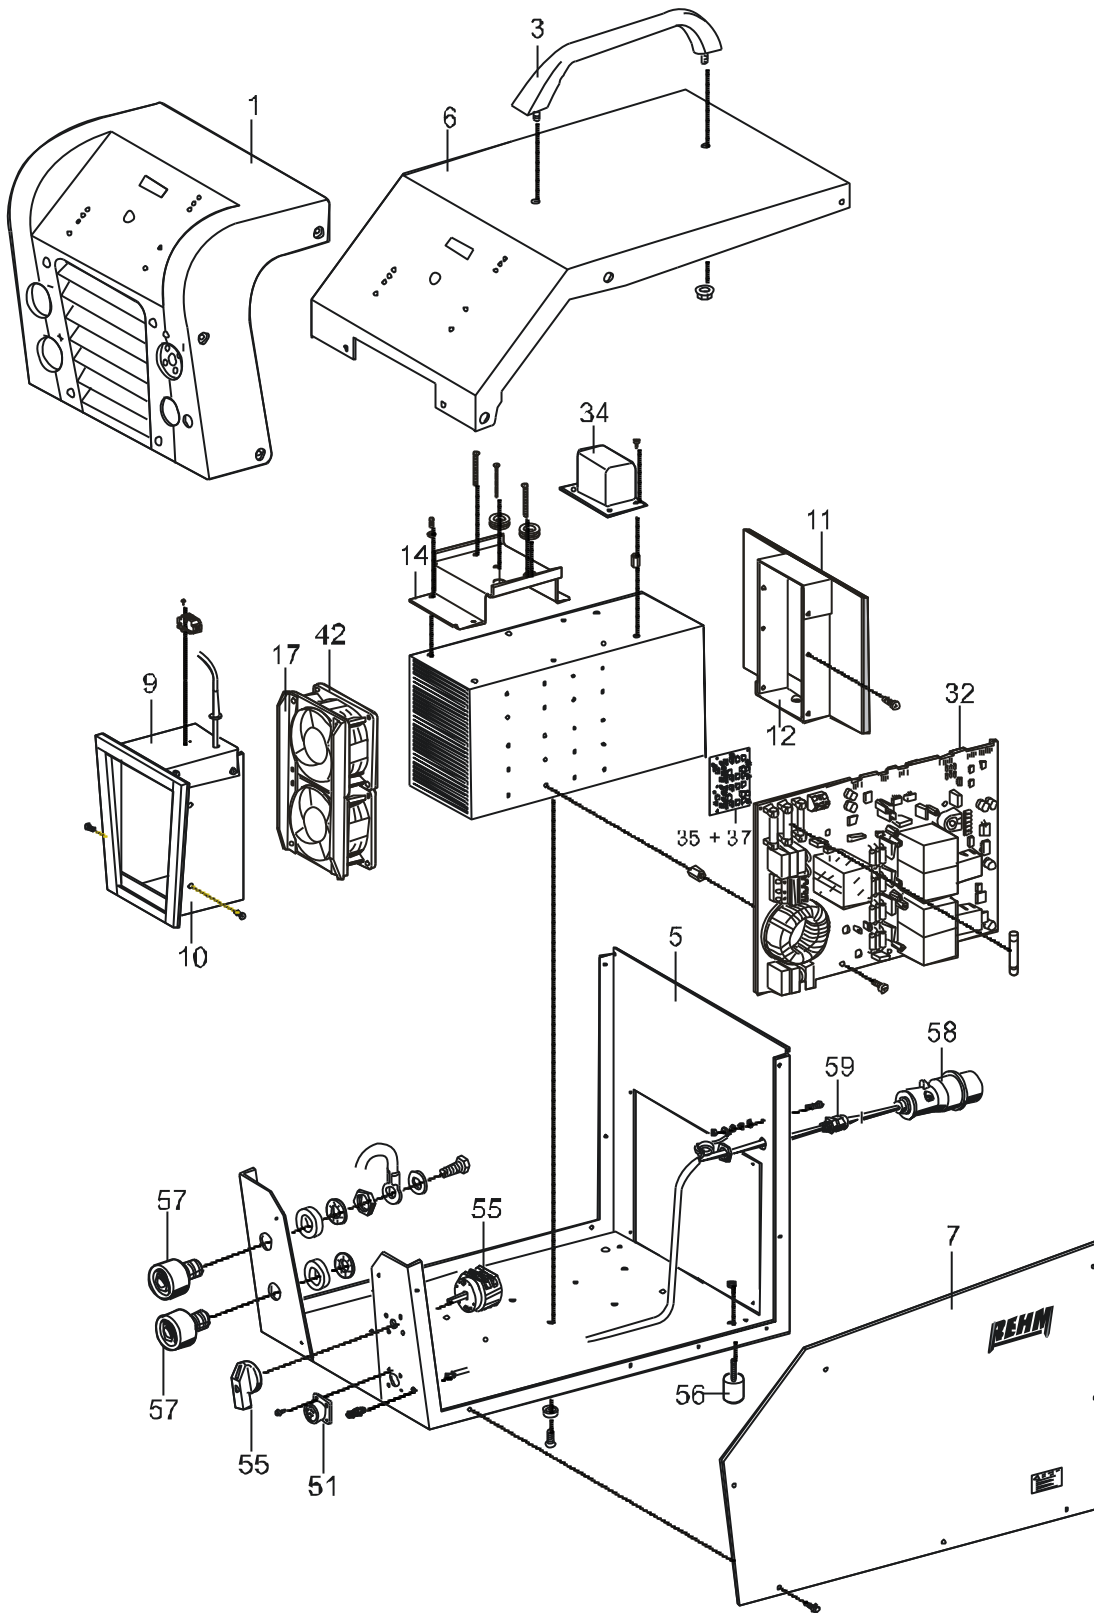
Exploded view BOOSTER.PRO 250 / 320 (right hand side)
